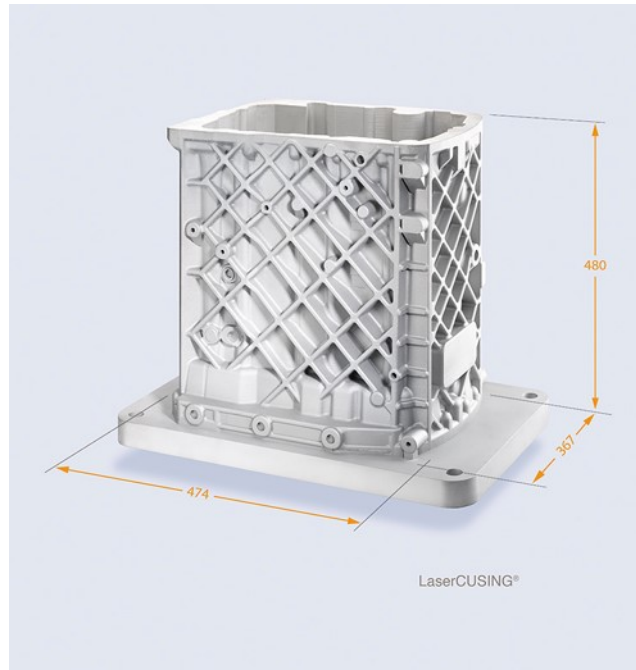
An engine block fabricated using laser based AM courtesy-Concept Laser machine [11]
